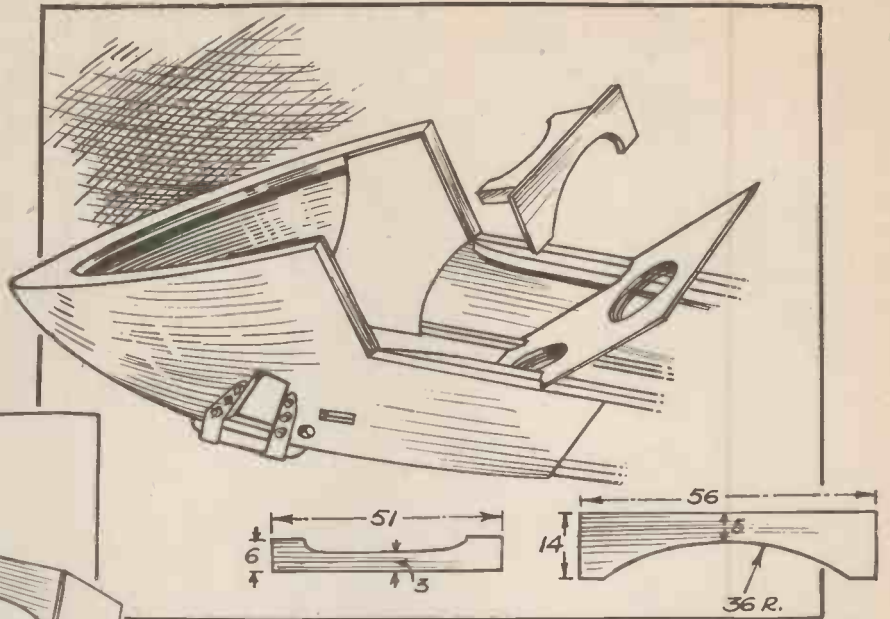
Showing further constructional details of the fuselage of the machine.
